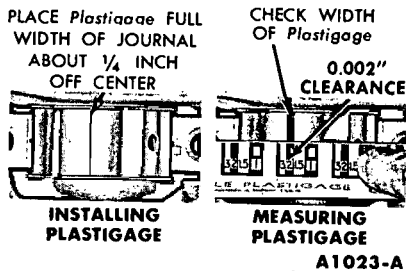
Installing and Measuring Plastigage—Engine on Work Stand
